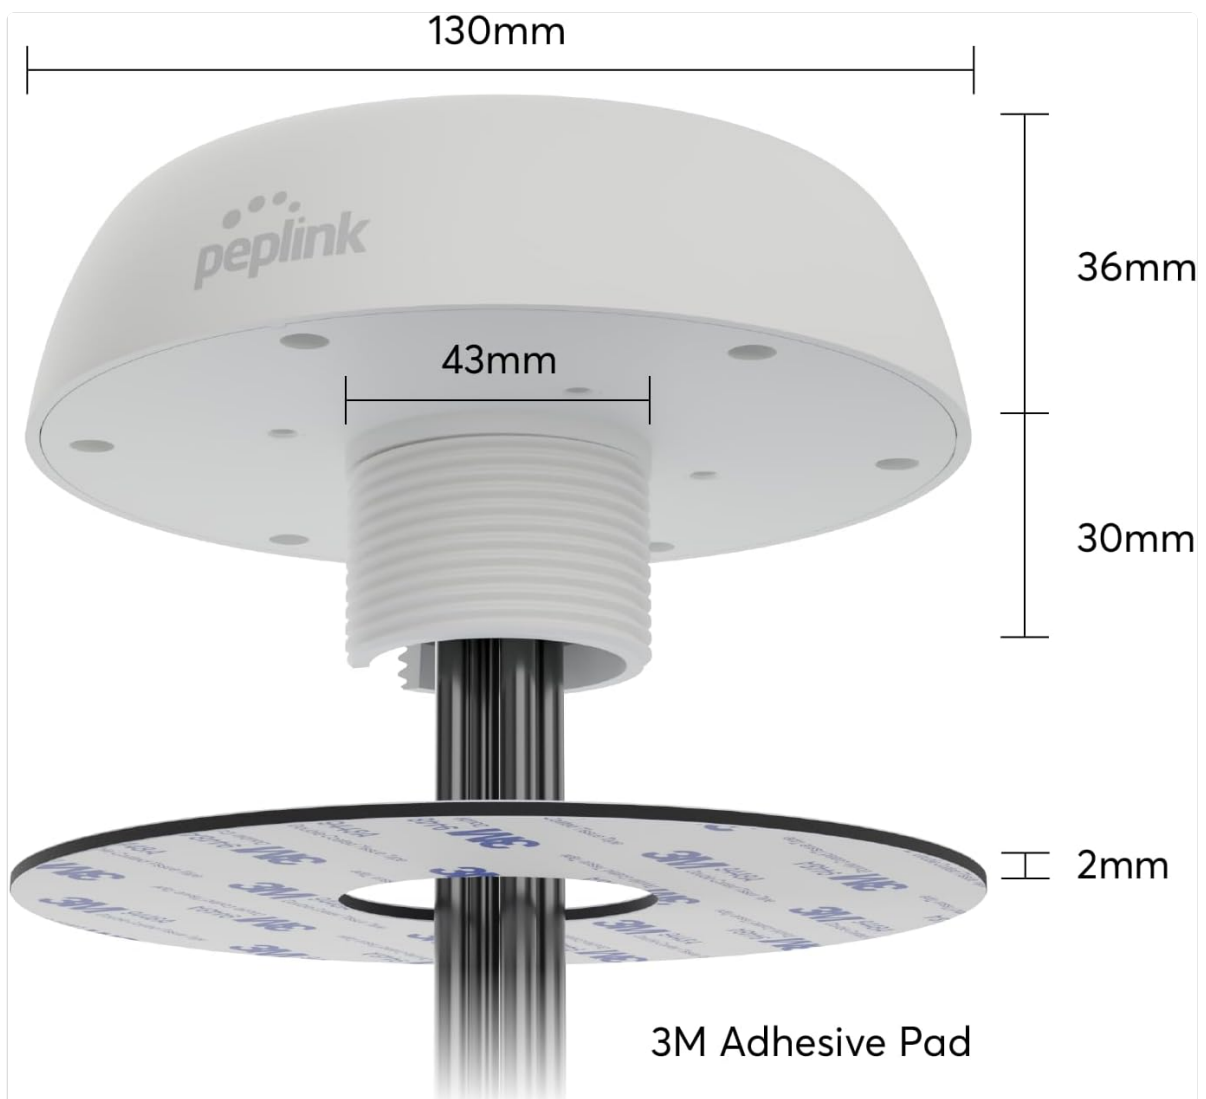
Antenna dimensions and 3M adhesive pad for mounting.
